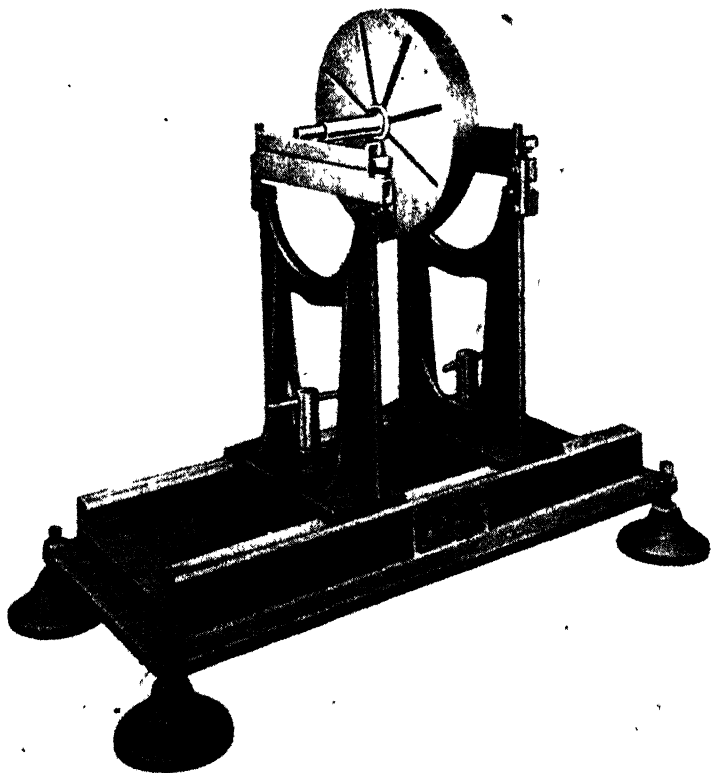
A FLYWHEEL-TYPE STATIC BALANCING MACHINE
